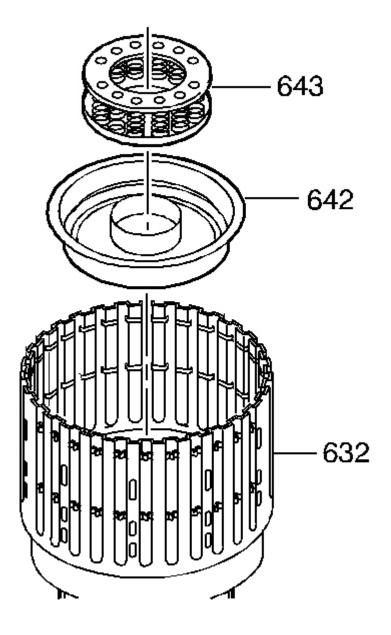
Locating Third Clutch Piston And Seal Assembly Courtesy of GENERAL MOTORS CORP.
